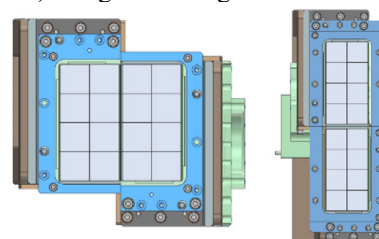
Technical drawing of a combined two module assembly resembling a squared and elongated sensor configuration.
